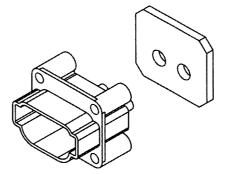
Sensor Receptacle Assembly (P/N 15684)
